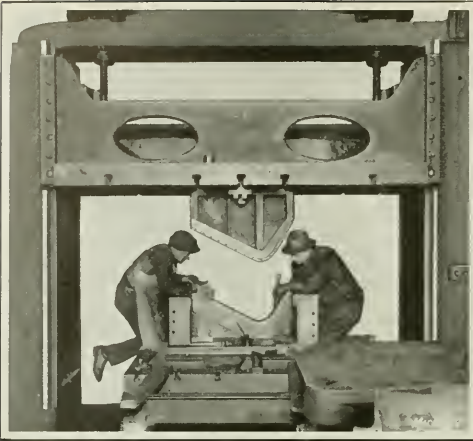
Matching the Male and Female Die Members of a Set in an Imprinting Machine
